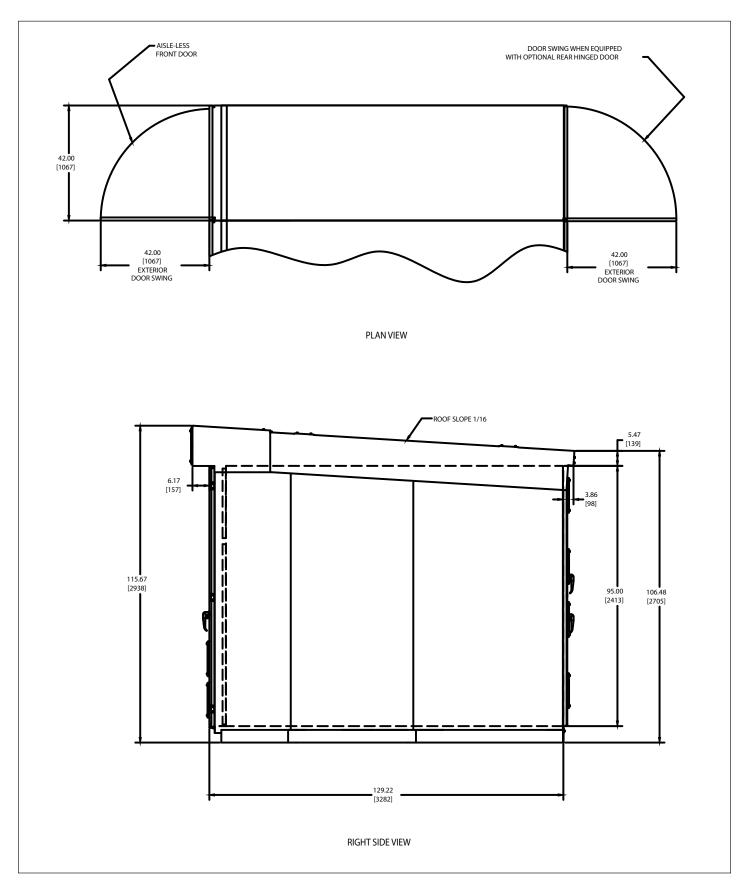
Outdoor Aisle-less Right Side View With Dimensions.
